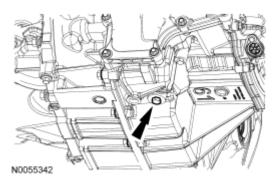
Identifying LH Halfshaft Courtesy of FORD MOTOR CO.
